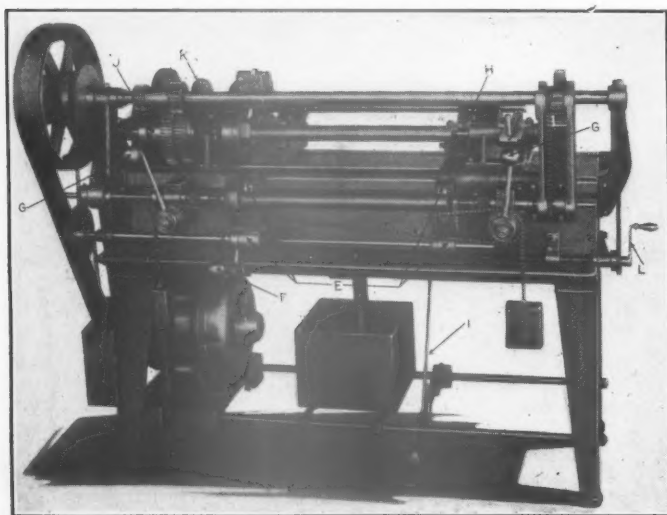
The Foster Bolt Centering Machine Which Centers and Points the End and Face Under the Head of the Bolt
